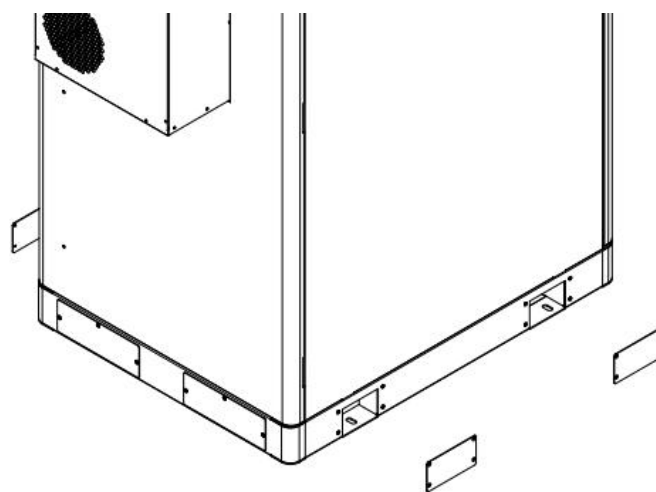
Forklift hole baffle assembly and disassembly diagram
